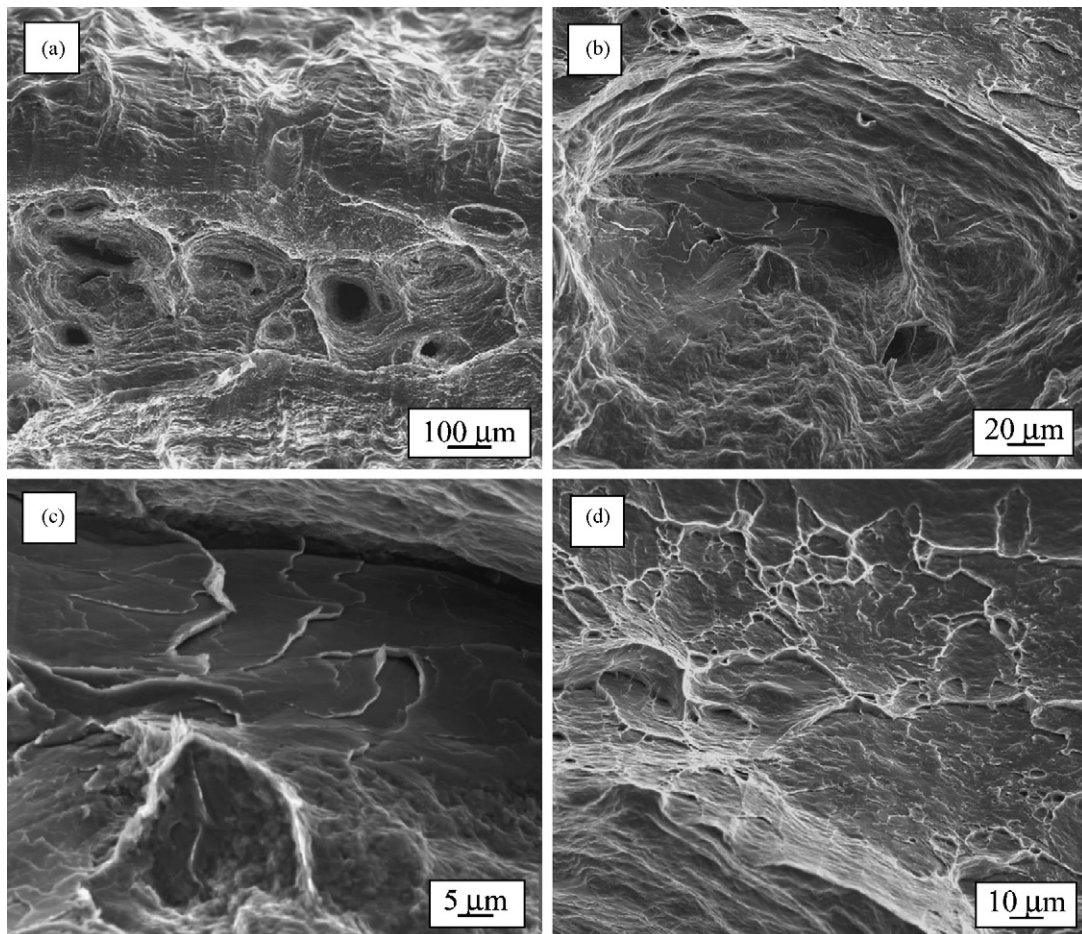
Fractograph of fine-grained specimen under strain rate of 1×10^{-3} : (a) fractograph; (b) cleavage planes in the center of a dimple; (c) details of (b); (d) interlaced structure of dimples and cleavage facets.
